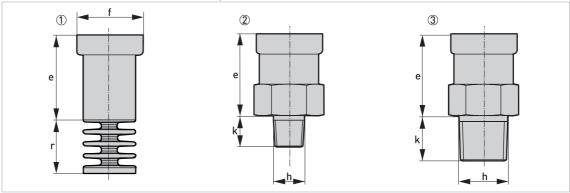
Dimensions for pressure transmitter with cooling fins and threaded connection (ANSI)
